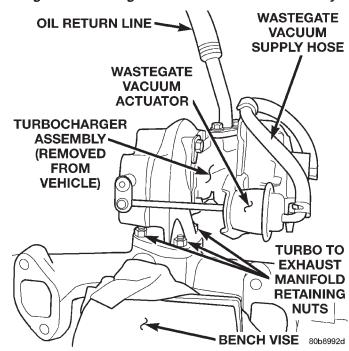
Turbocharger / Exhaust Manifold Assembly
